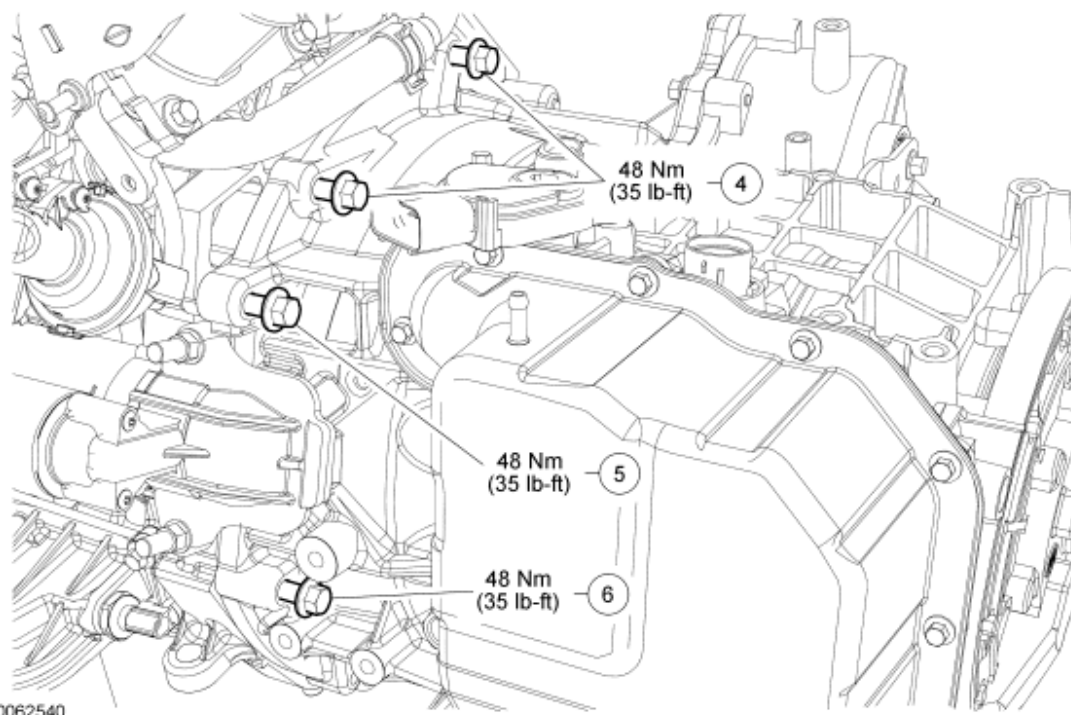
Oil Pan, Oil Pump Screen and Pickup Tube, Front Wheel Drive (FWD) Vehicles With Torque
